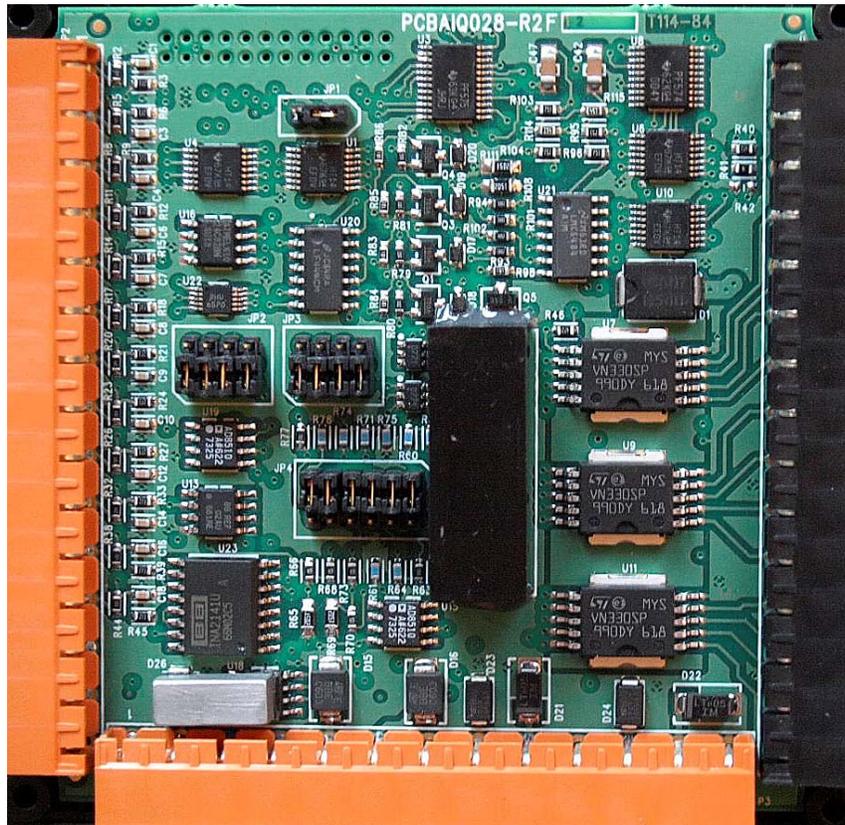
XL6 I/O Cover Removed (sample I/O board)
